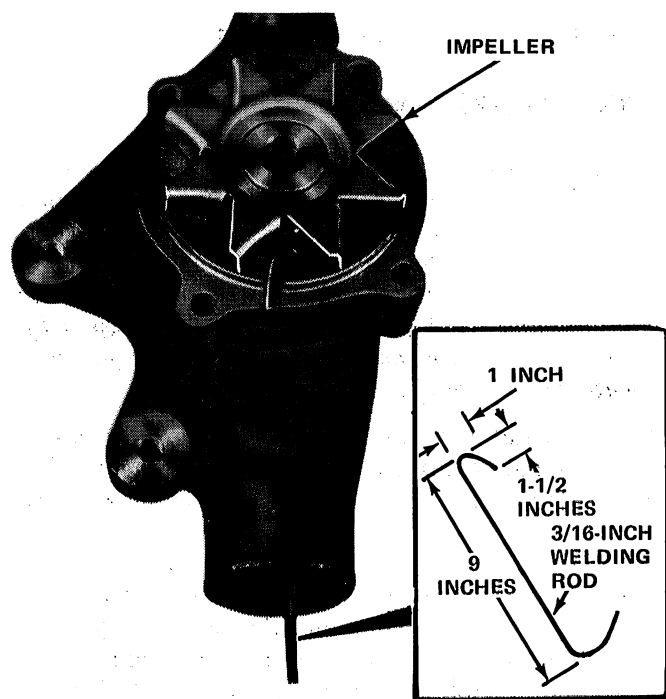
C-5 Testing Water Pump for Loose Impeller—Typical
